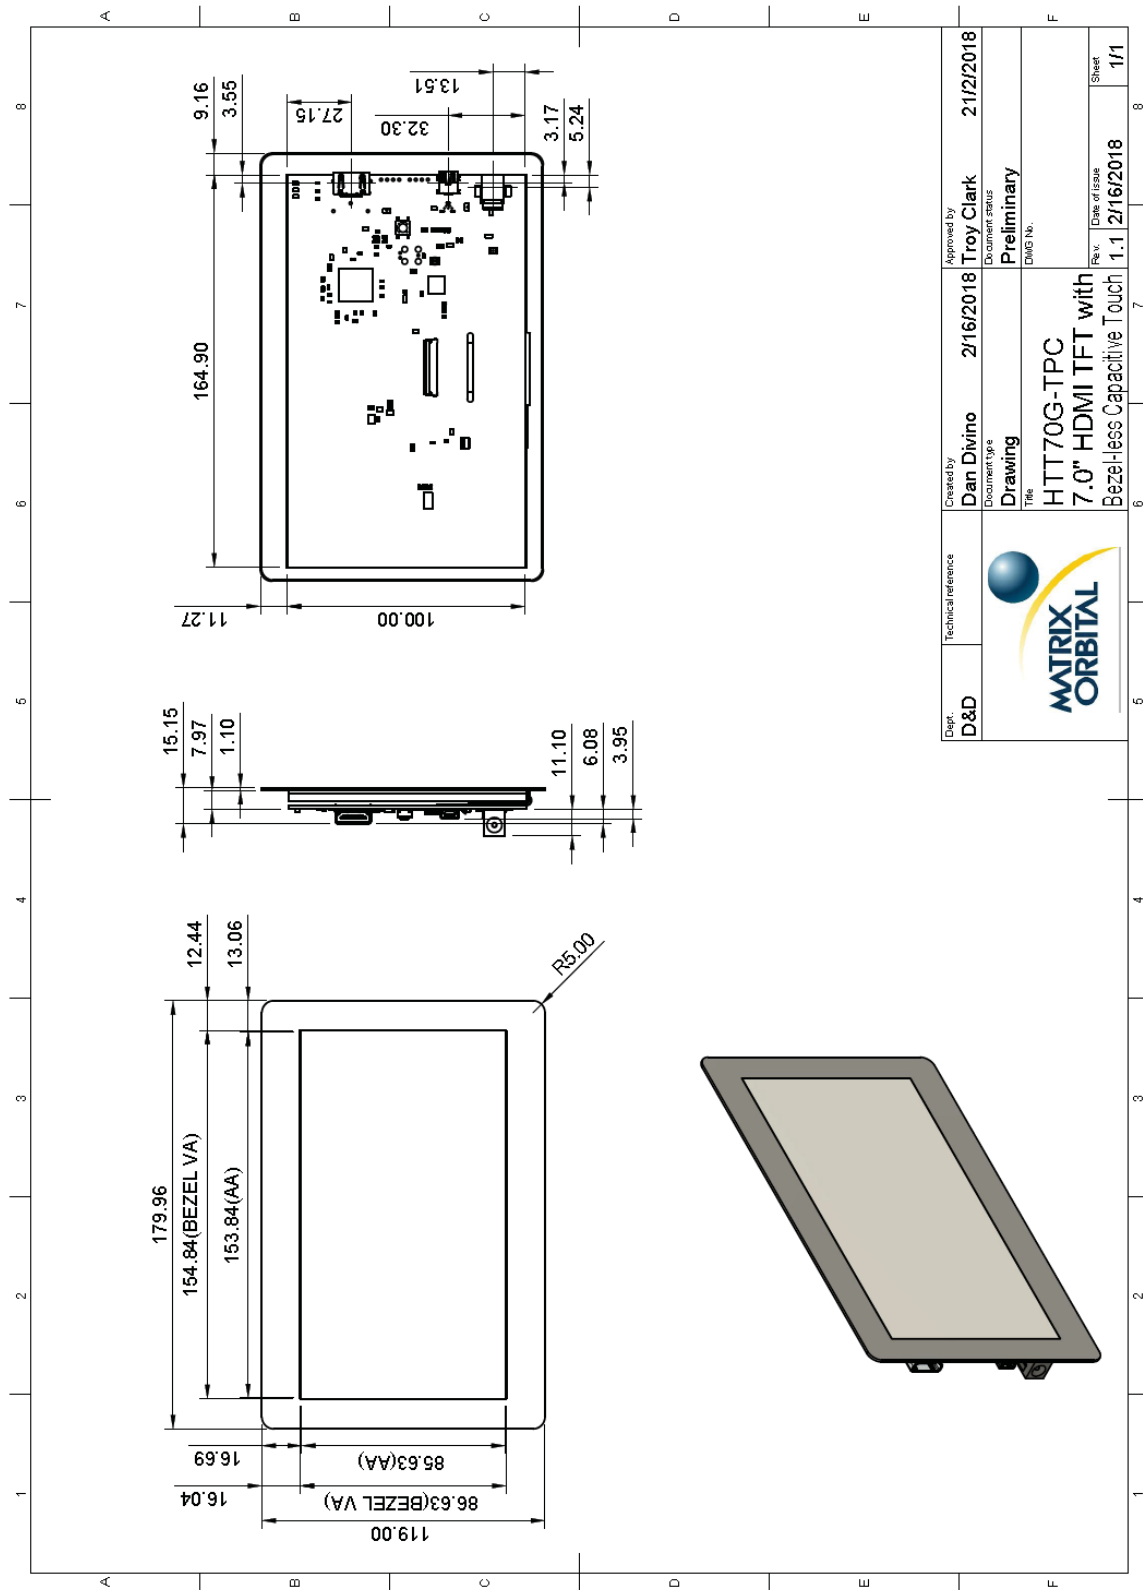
Bezel-less Capacitive Touch Panel HTT70G Dimensional Drawing
